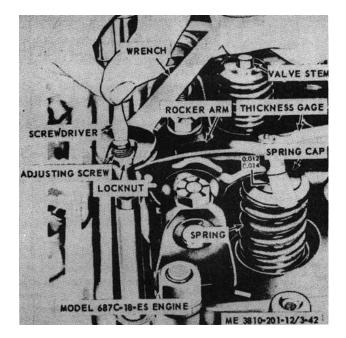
Valve (rocker arm) adjustment, model 687C-18-ES engine.
